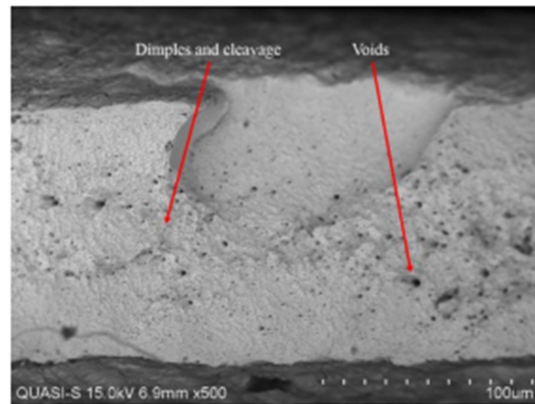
SEM fracture tensile for A240 stainless steel sheet (500X magnification).
